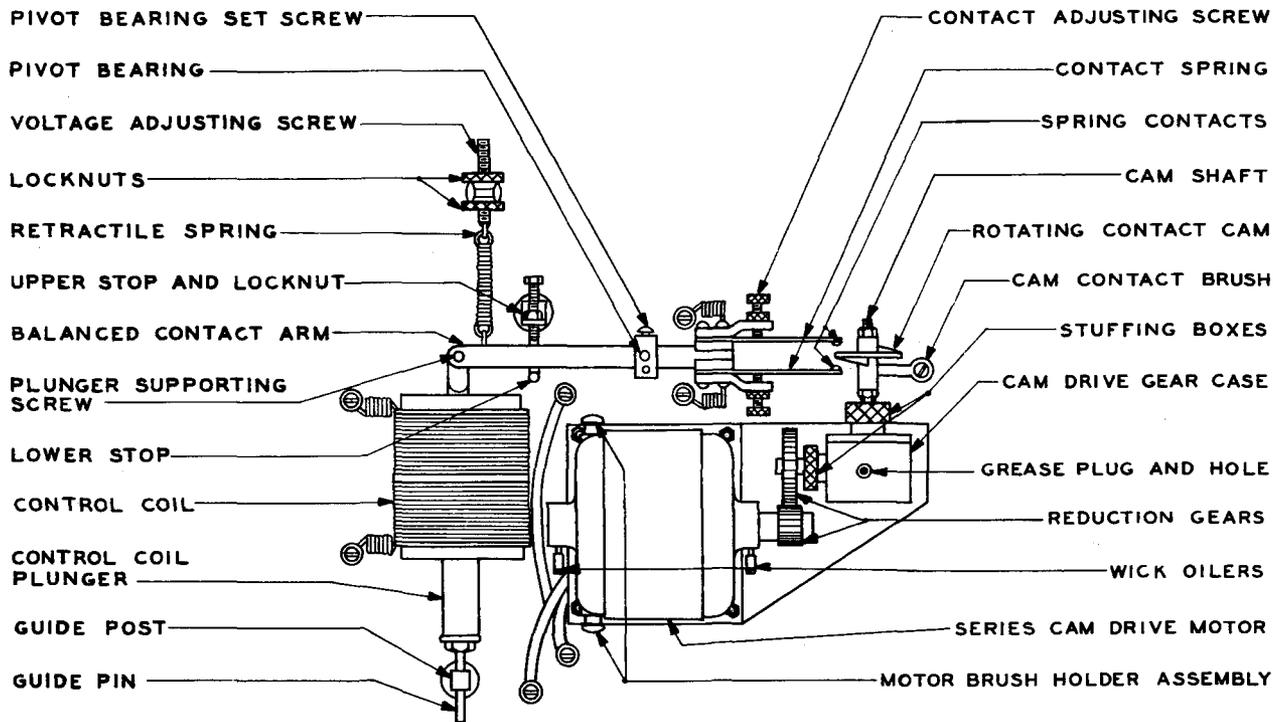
Voltage Controller — KS-5016 and KS-5117
